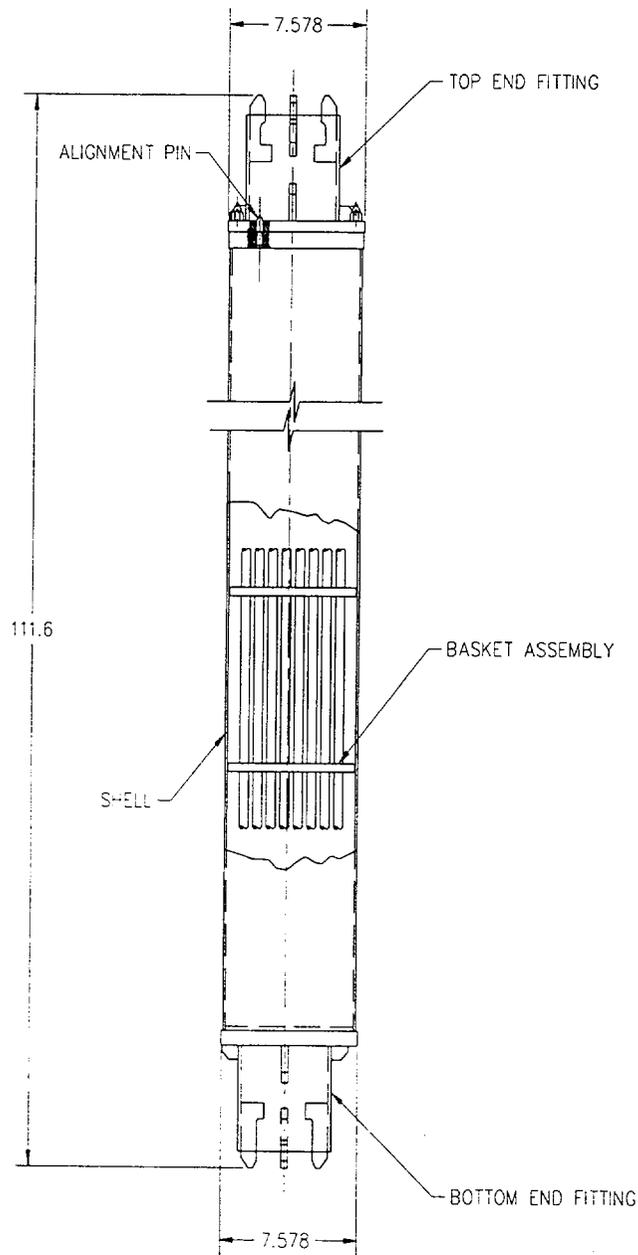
Reconfigured Fuel Assembly Cross-Section
